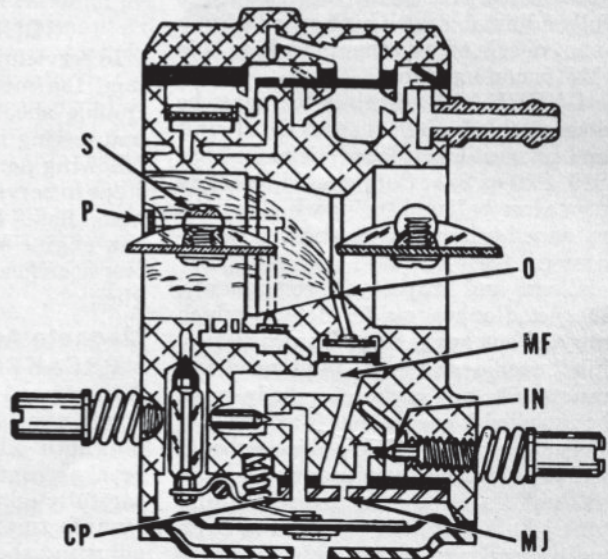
Cross-sectional view of Walbro model HDC carburetor showing accelerator pump pulse passage (P). Refer to text for operation.
